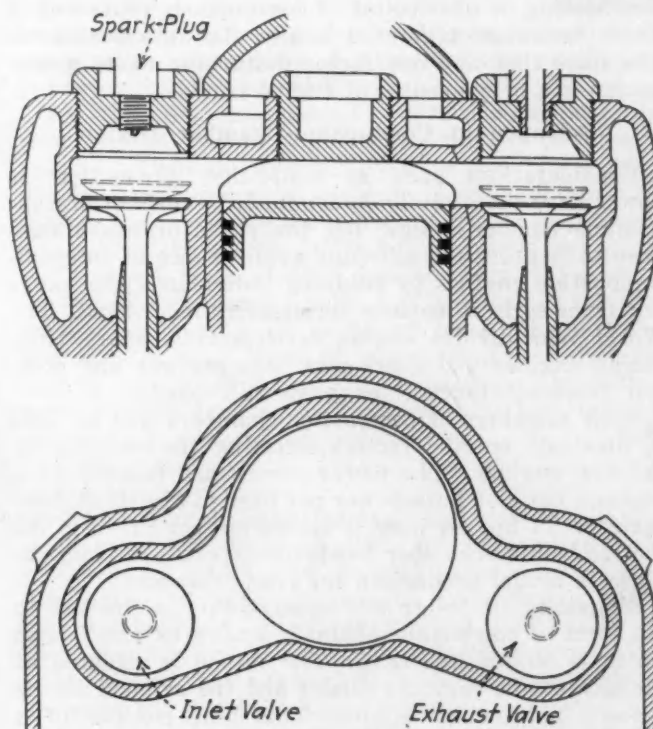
T-HEAD COMBUSTION-CHAMBER
